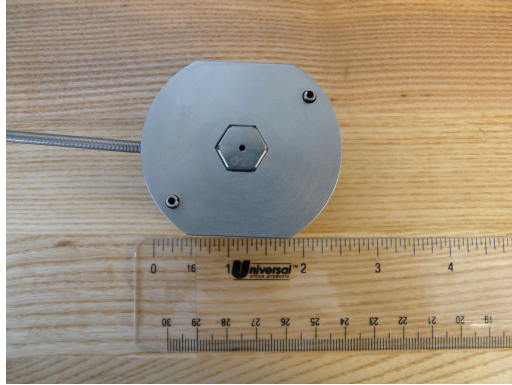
Top view of custom load cell fixture. The hex-shaped component on top is a simulated abutment counterbore surface
